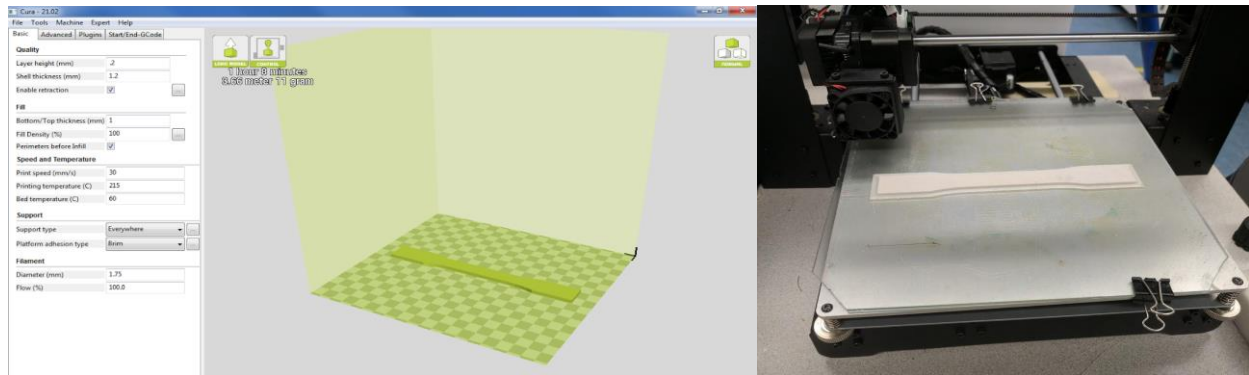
Build Tray Preparation in Cura (left) and Printed Tensile Specimen (right)
